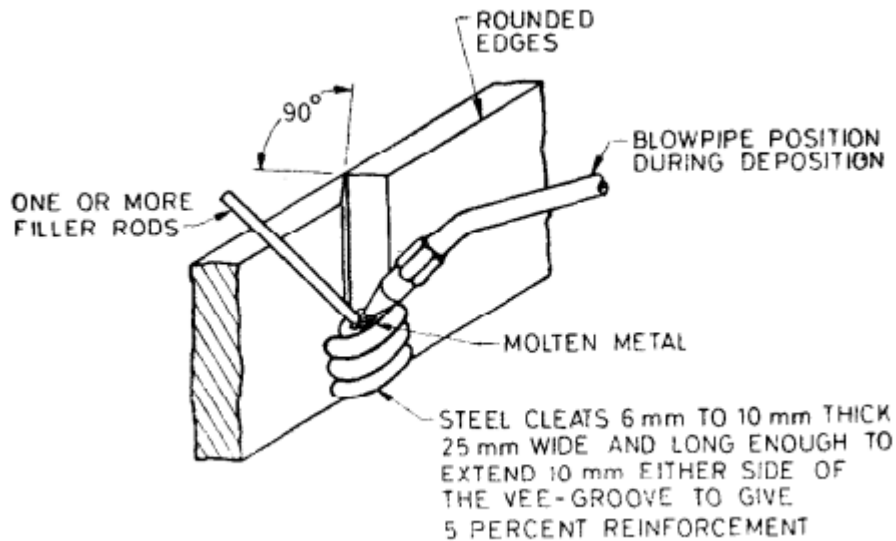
CLEAT METHOD OF BRONZE WELDING
